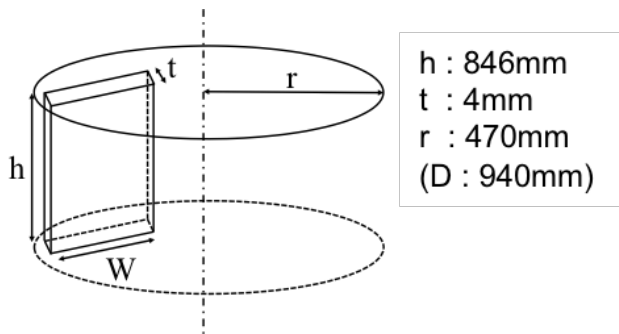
Dimensions of a single blade and size of the turbine.
